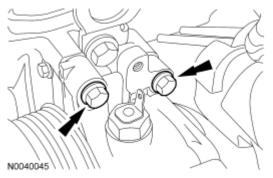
Locating Upper Power Steering Pump Bolts Courtesy of FORD MOTOR CO.
